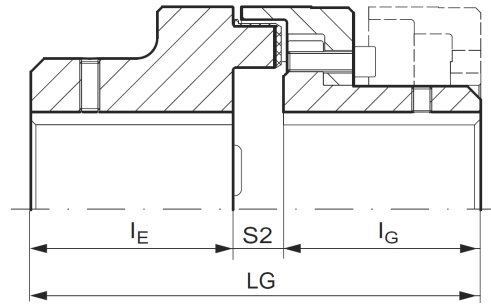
Mounting dimensions of the Nor-Mex G coupling
